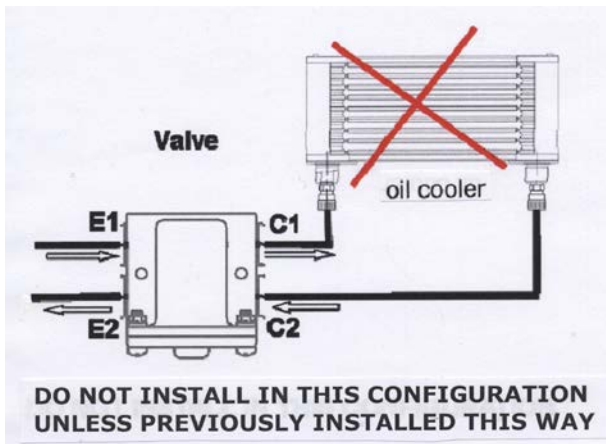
Inverted oil cooler may only be used if oriented this way before installing valve.
